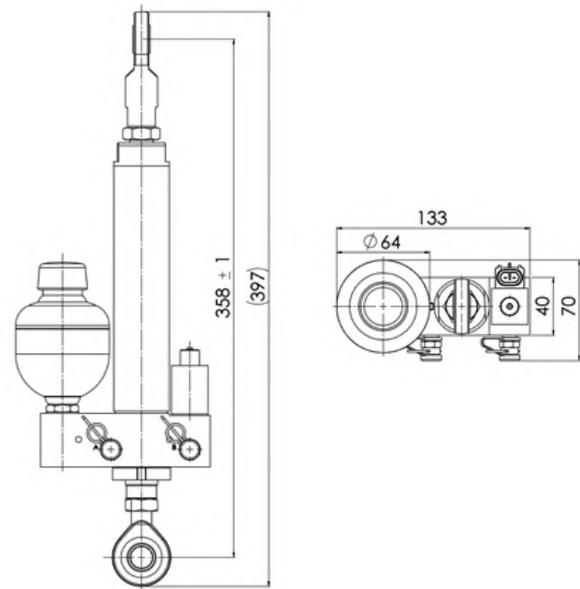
Design drawing of the HLU-LE25 with 80mm hub.
